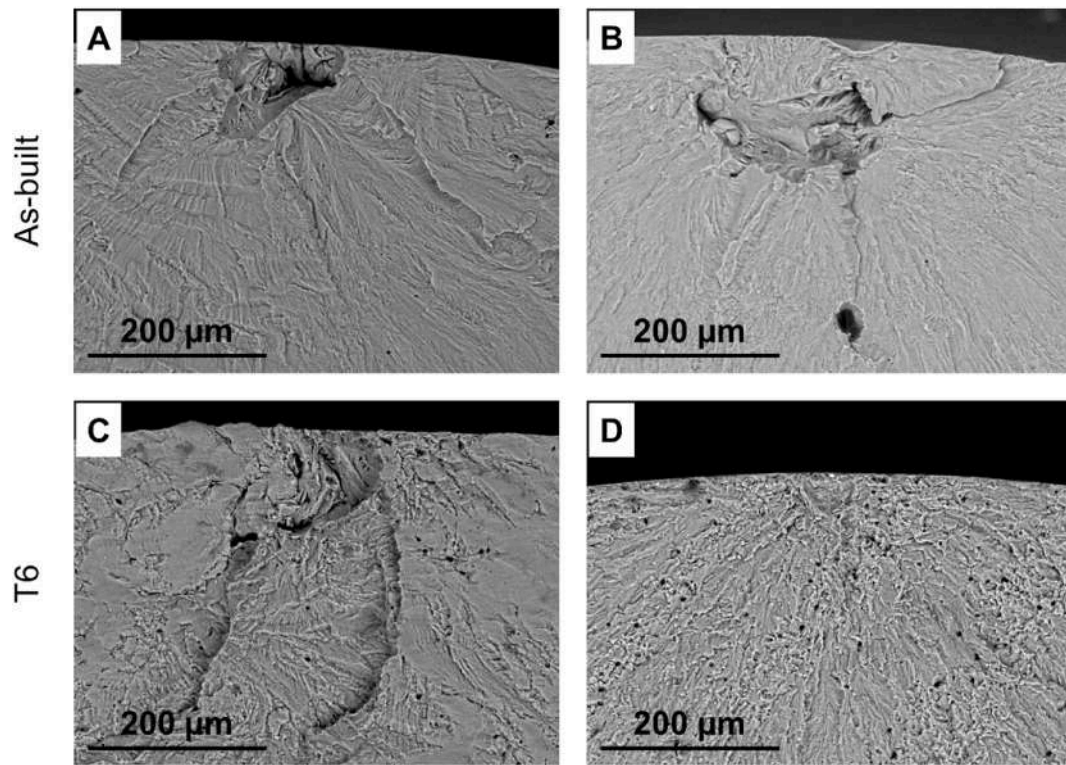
Fracture surfaces of “average samples”: first zone with triggering defect. A) XY-AB; B) Z-AB; C) XY-T6; D) Z-T6.
